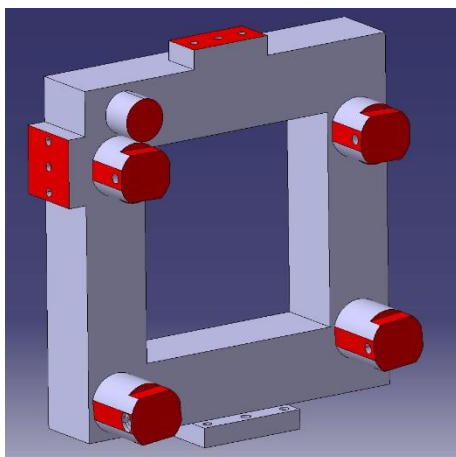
Welding Tools: Rear Frame Toll, details.
